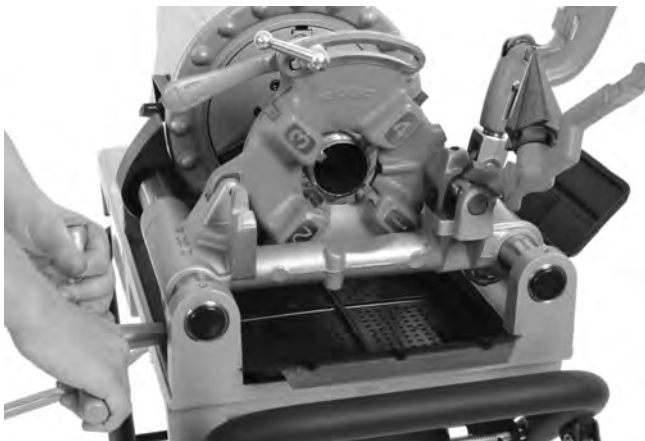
Threading Pipe (811-A Quick Opening Die Head shown)
